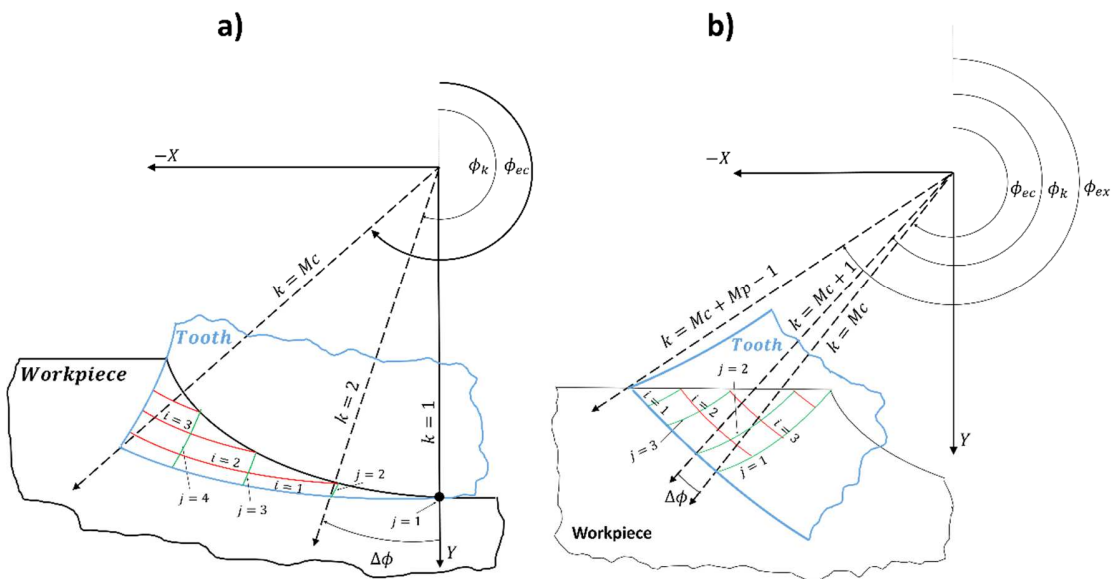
Up-milling zones. a) unmachined zone scheme, b) machined zone scheme
